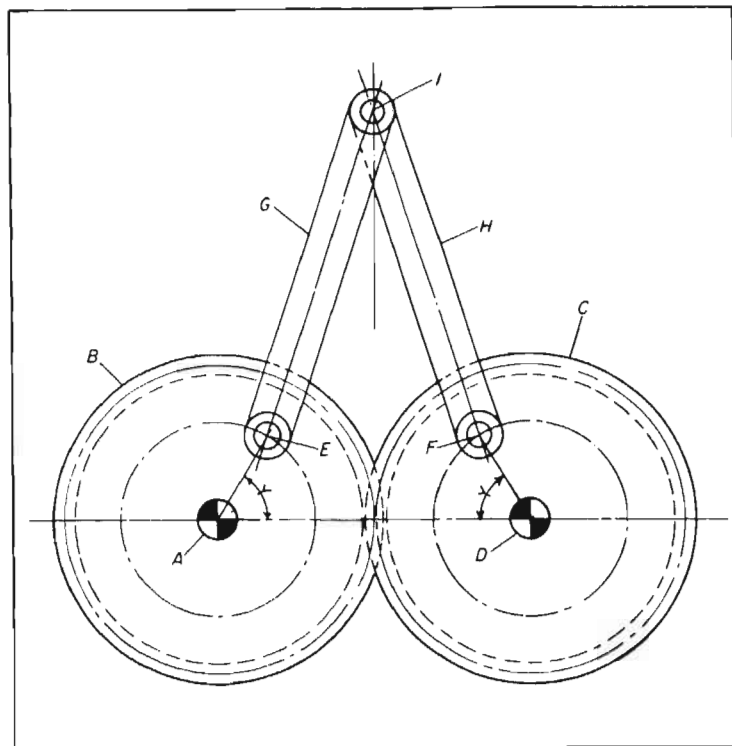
Simple mechanism for obtaining straight-line motion through gearing.
